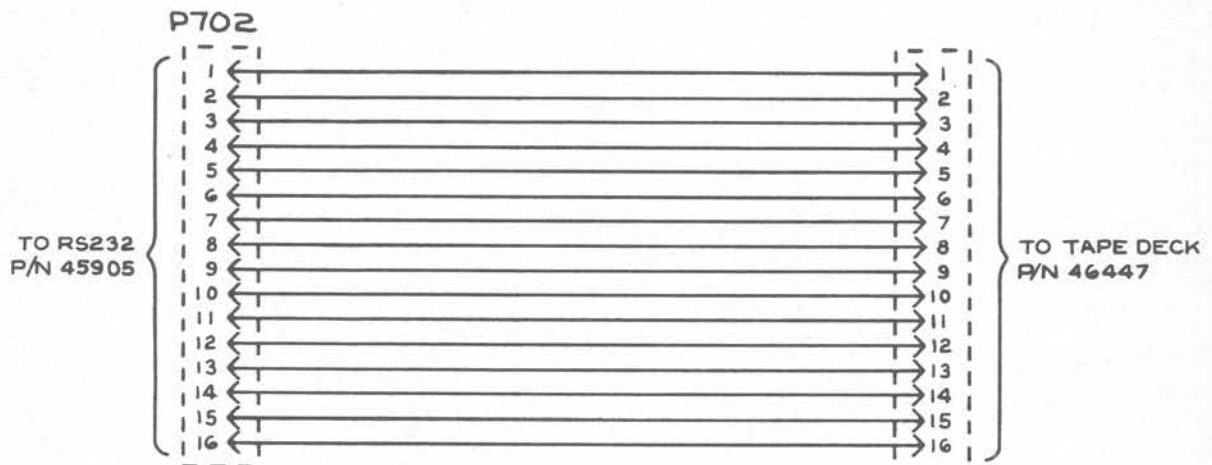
Tape Deck-to-RS232 Cable Assembly (Part No. 47254)
